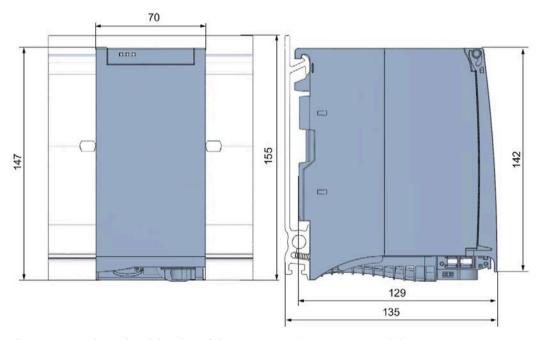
Dimensional drawing of the PS 60W 120/230V AC/DC module
